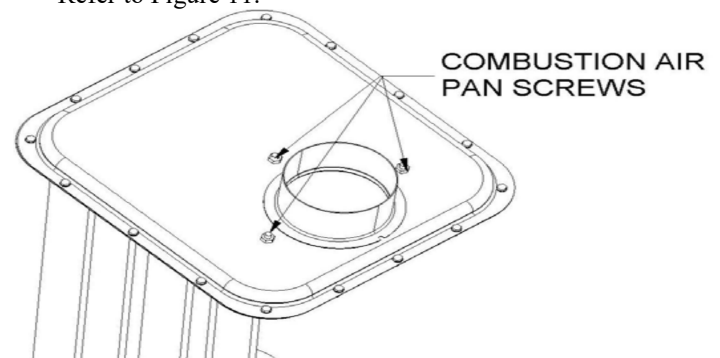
Top Cover Screws and Combustion Air Pan Screws
